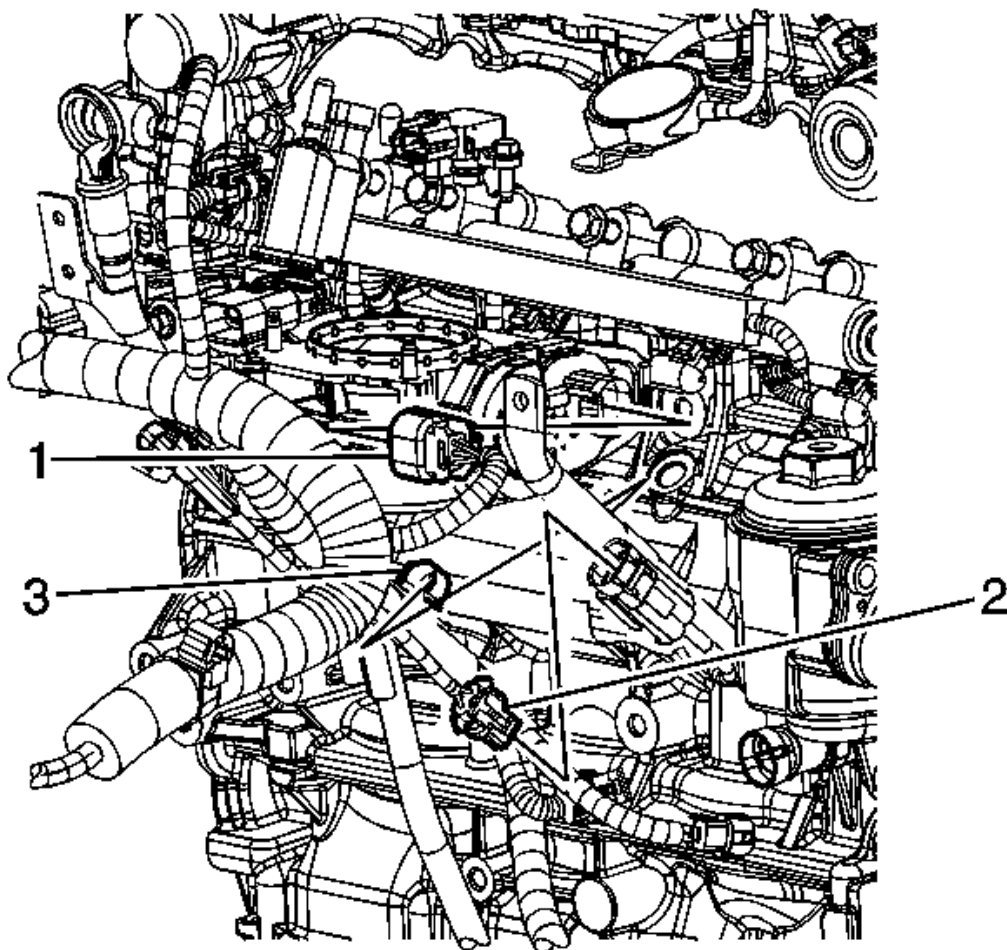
Identifying Throttle Actuator & Knock Sensor Electrical Connectors & Harness Clip
